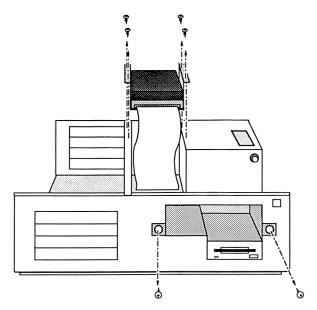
Remove internal hard drive mount and drive bay screws.
